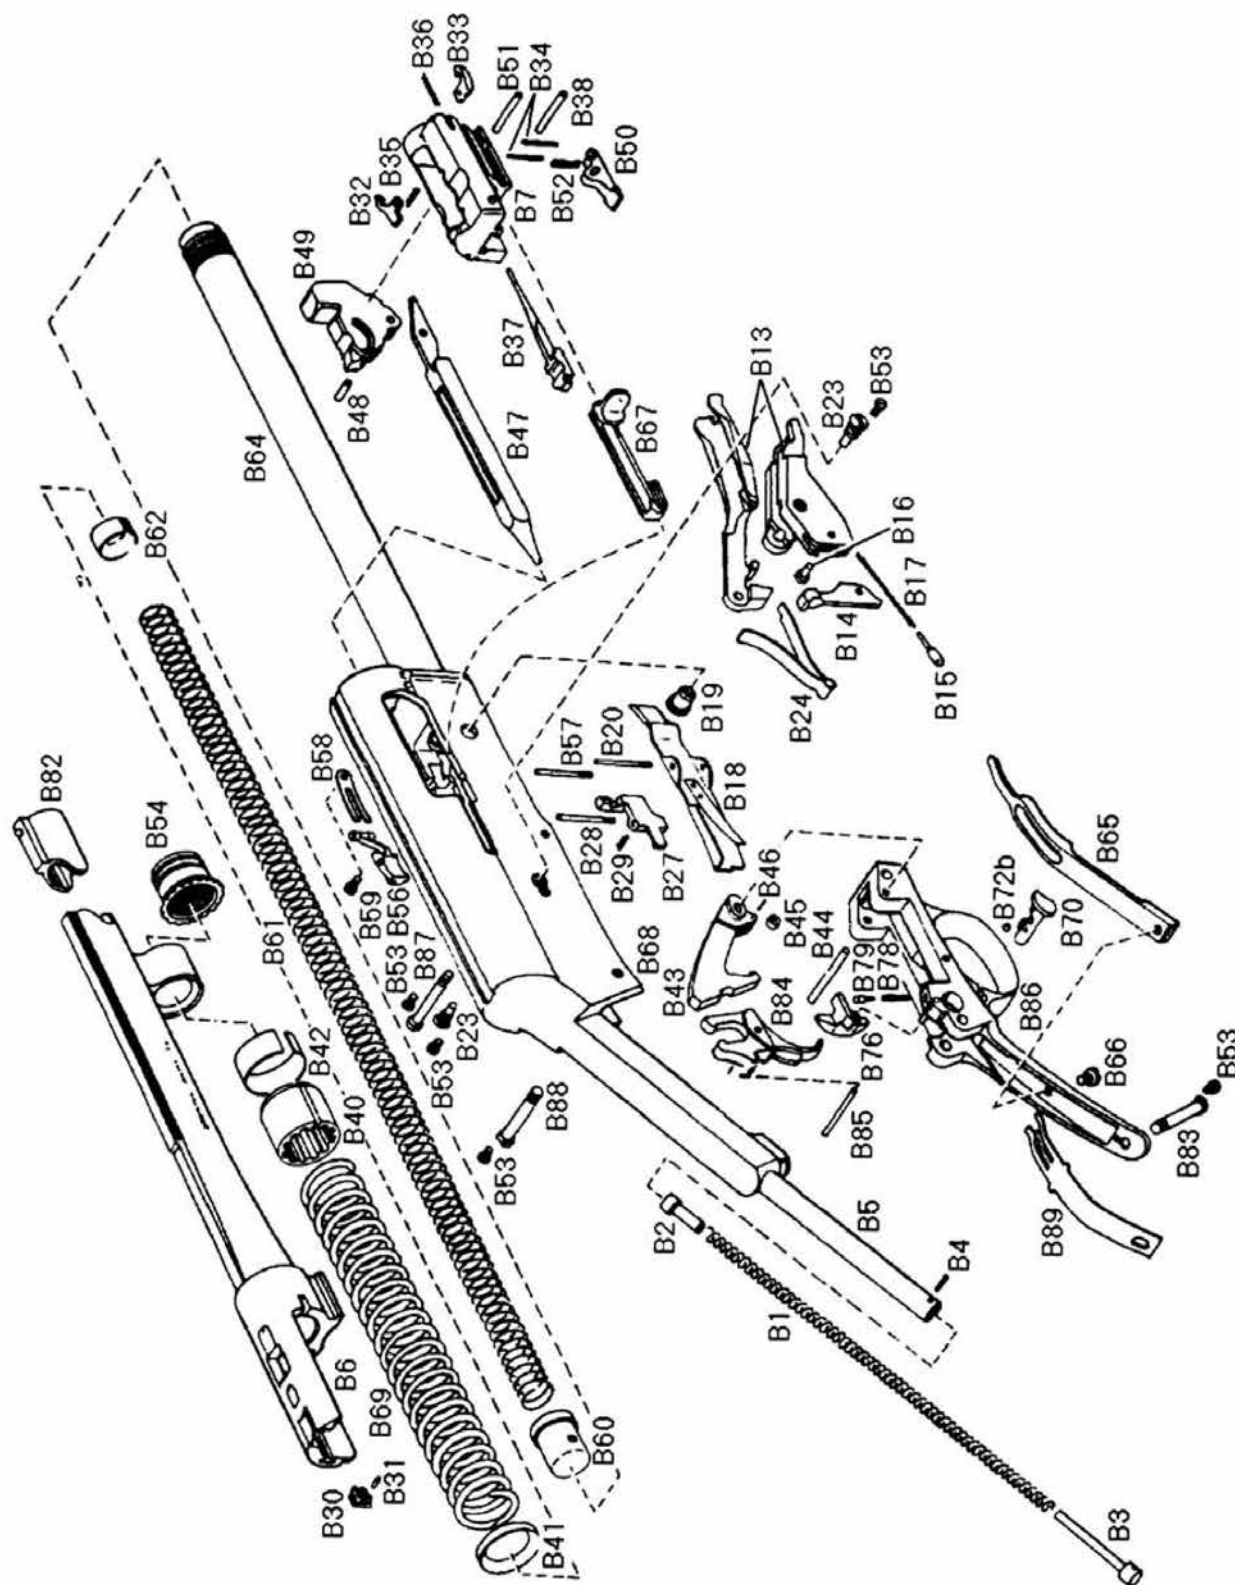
An exploded view of a Browning A-5 semi-automatic shotgun. This will help you during disassembly and assembly.
